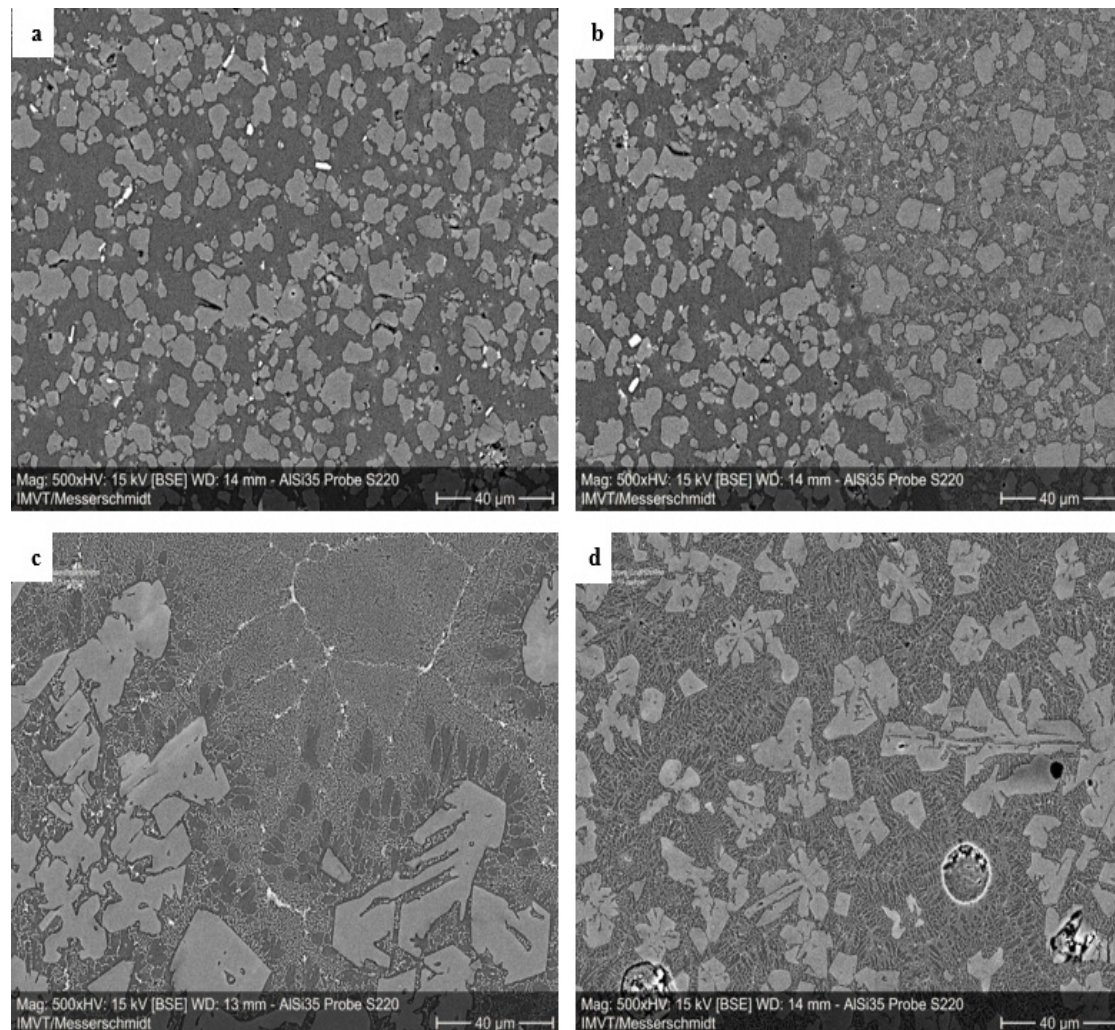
S220: (a) Base material; (b) Transition of weld seam to base material; (c) Center of the weld seam for $v = 0.5$ m/min; (d) Center of the weld seam for $v = 10$ m/min.
